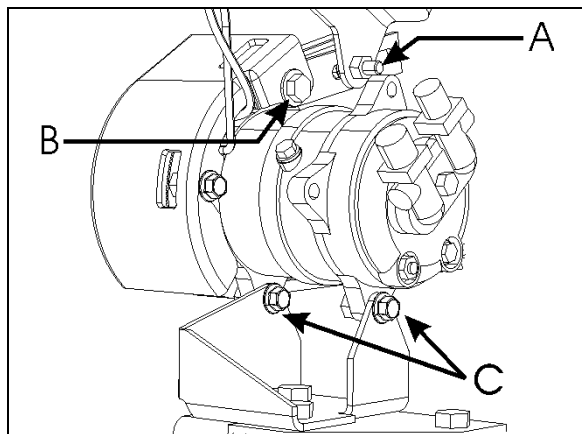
COMPRESSOR REMOVAL OR INSTALLATION 22349
